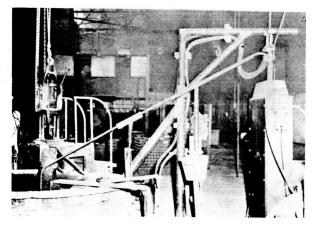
is a view of the vehicle's hull being welded, and figure 14 shows the completed M113 armored personnel carrier.
